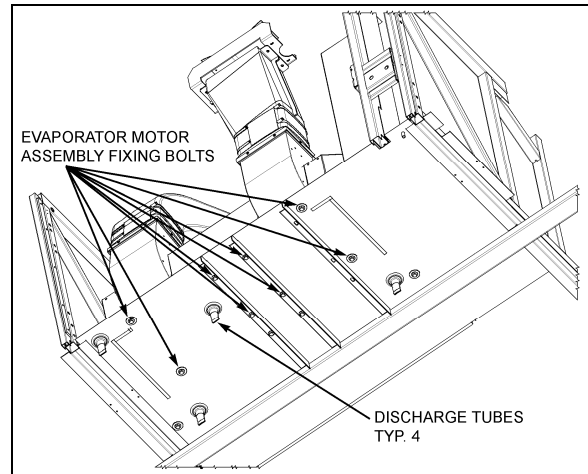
EVAPORATOR MOTOR ASSY FIXING BOLTS 22315
